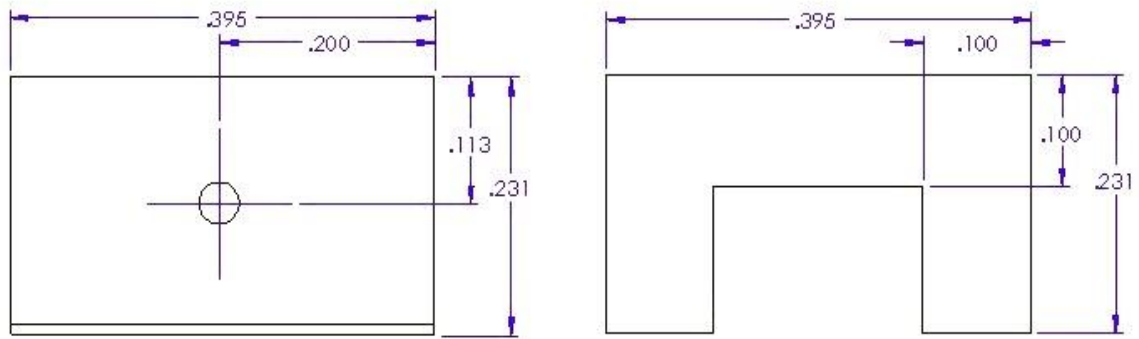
Dimensional sketches of the razor blade (left) and U-shaped spacer (right) in inches
